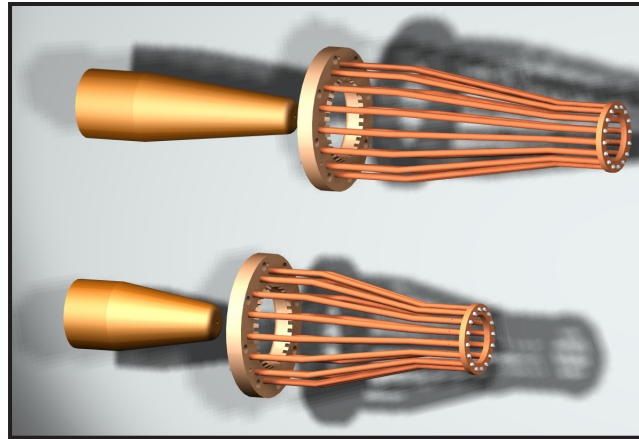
Exploded view of the tapered anode and cathode design, illustrating tapering
